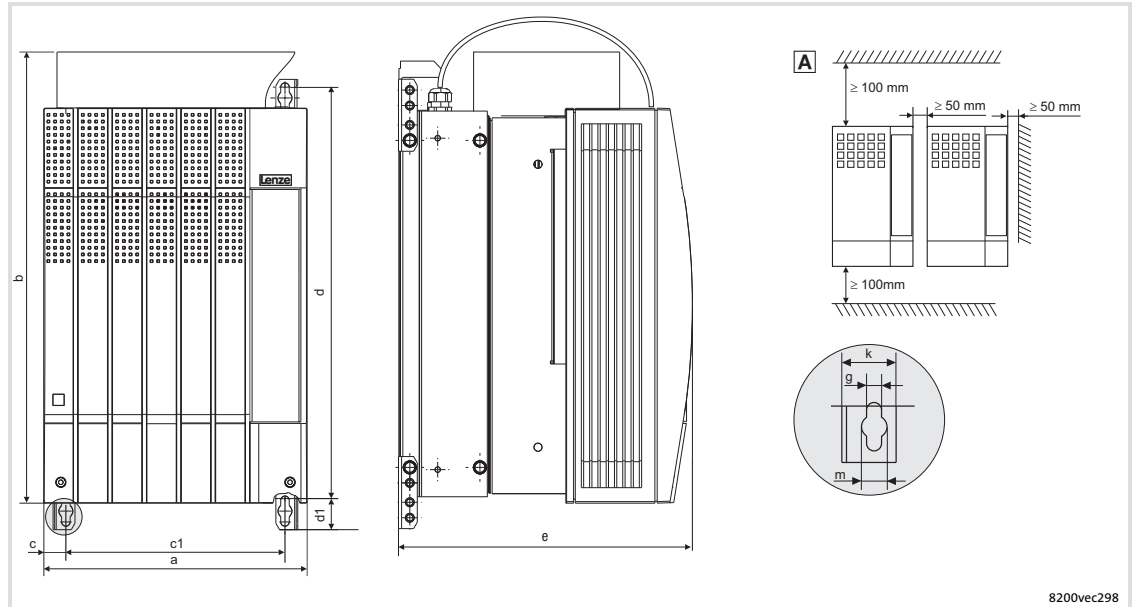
Standard mounting with fixing brackets 55 kW
